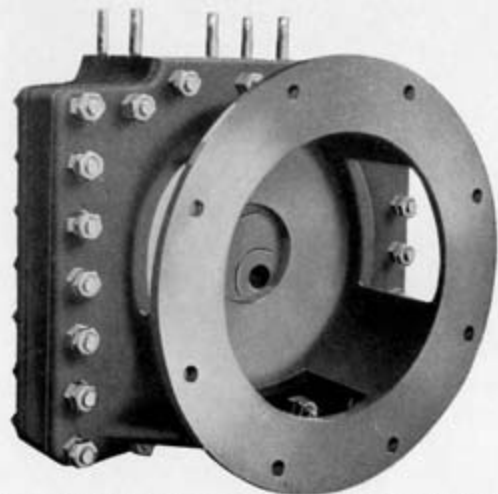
Stoker Engine and Crank Case, Rear View showing hole in inner piston which receives the crank pin.
